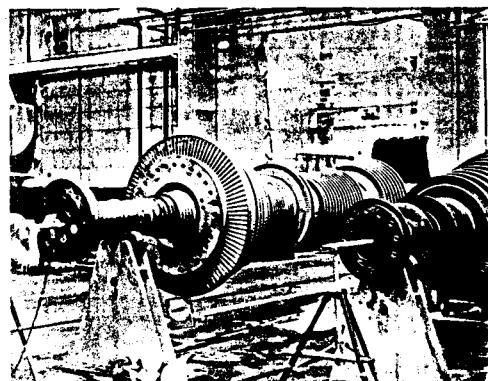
Photograph of borescope being used to visually examine the bore of turbine rotor
